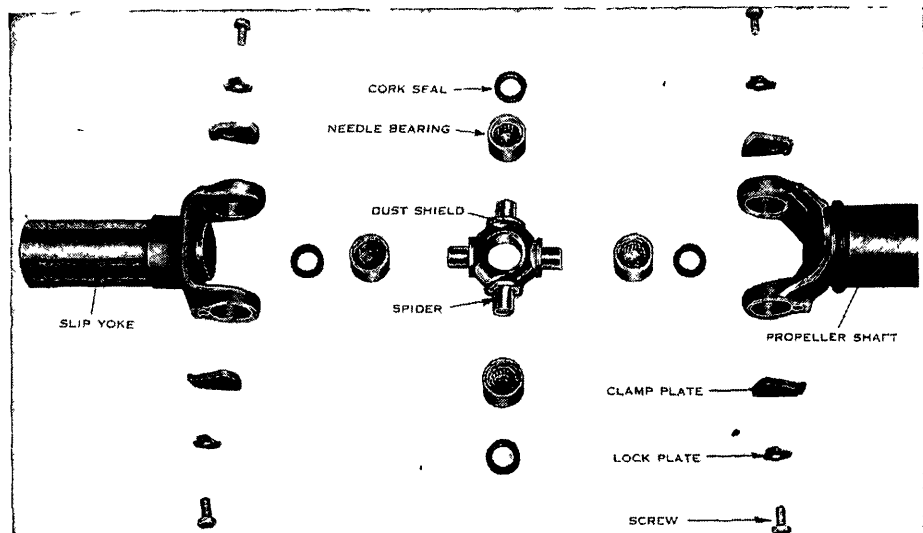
Exploded view of Saginaw Cross & Yoke Joint
